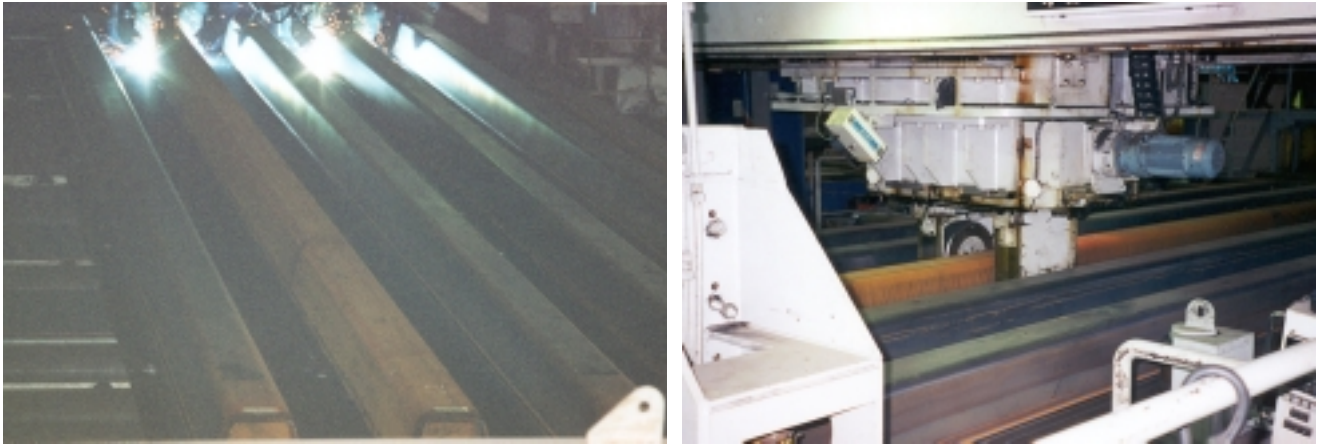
Box girder web and flange panel assembly line at Tsu Works.
